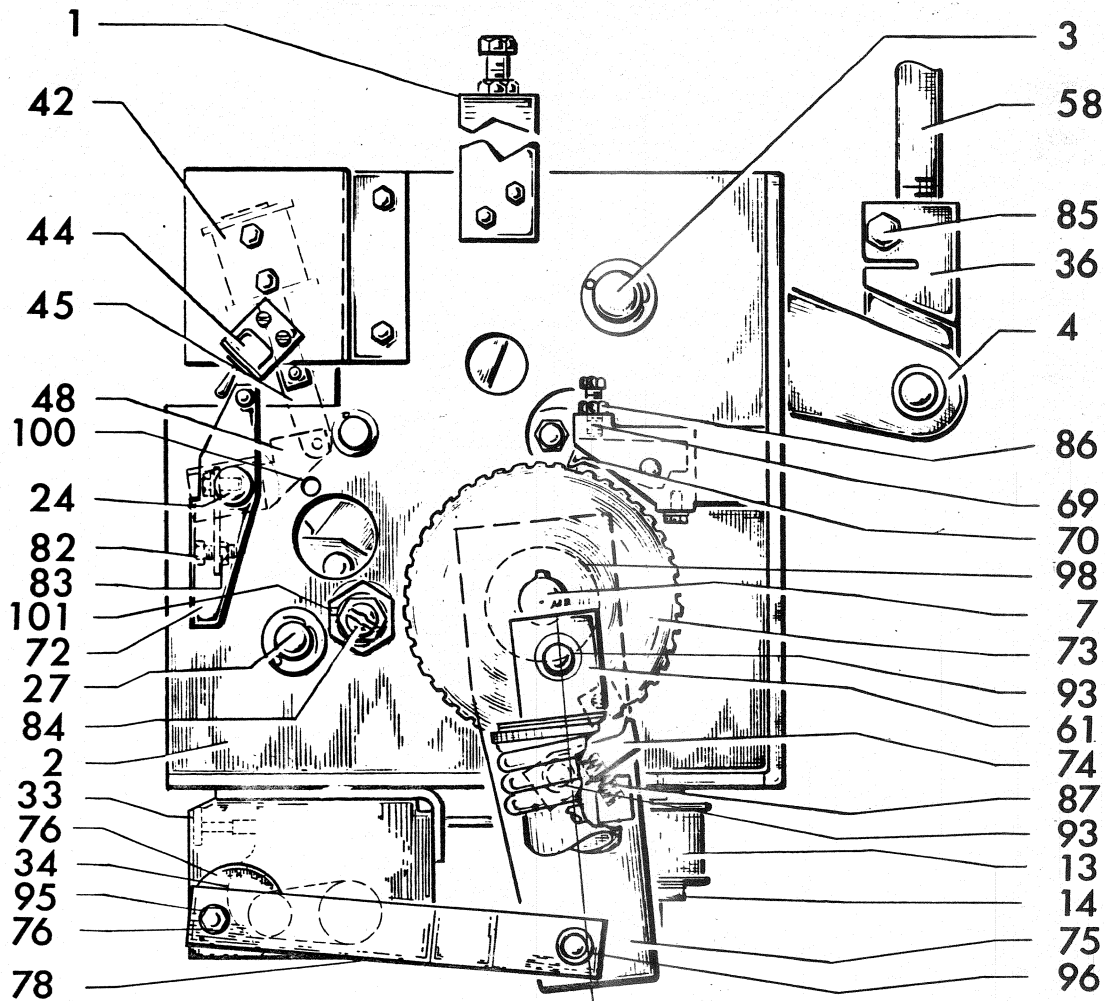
(0832D0149 Sheet 1, View I Rev. 1)
